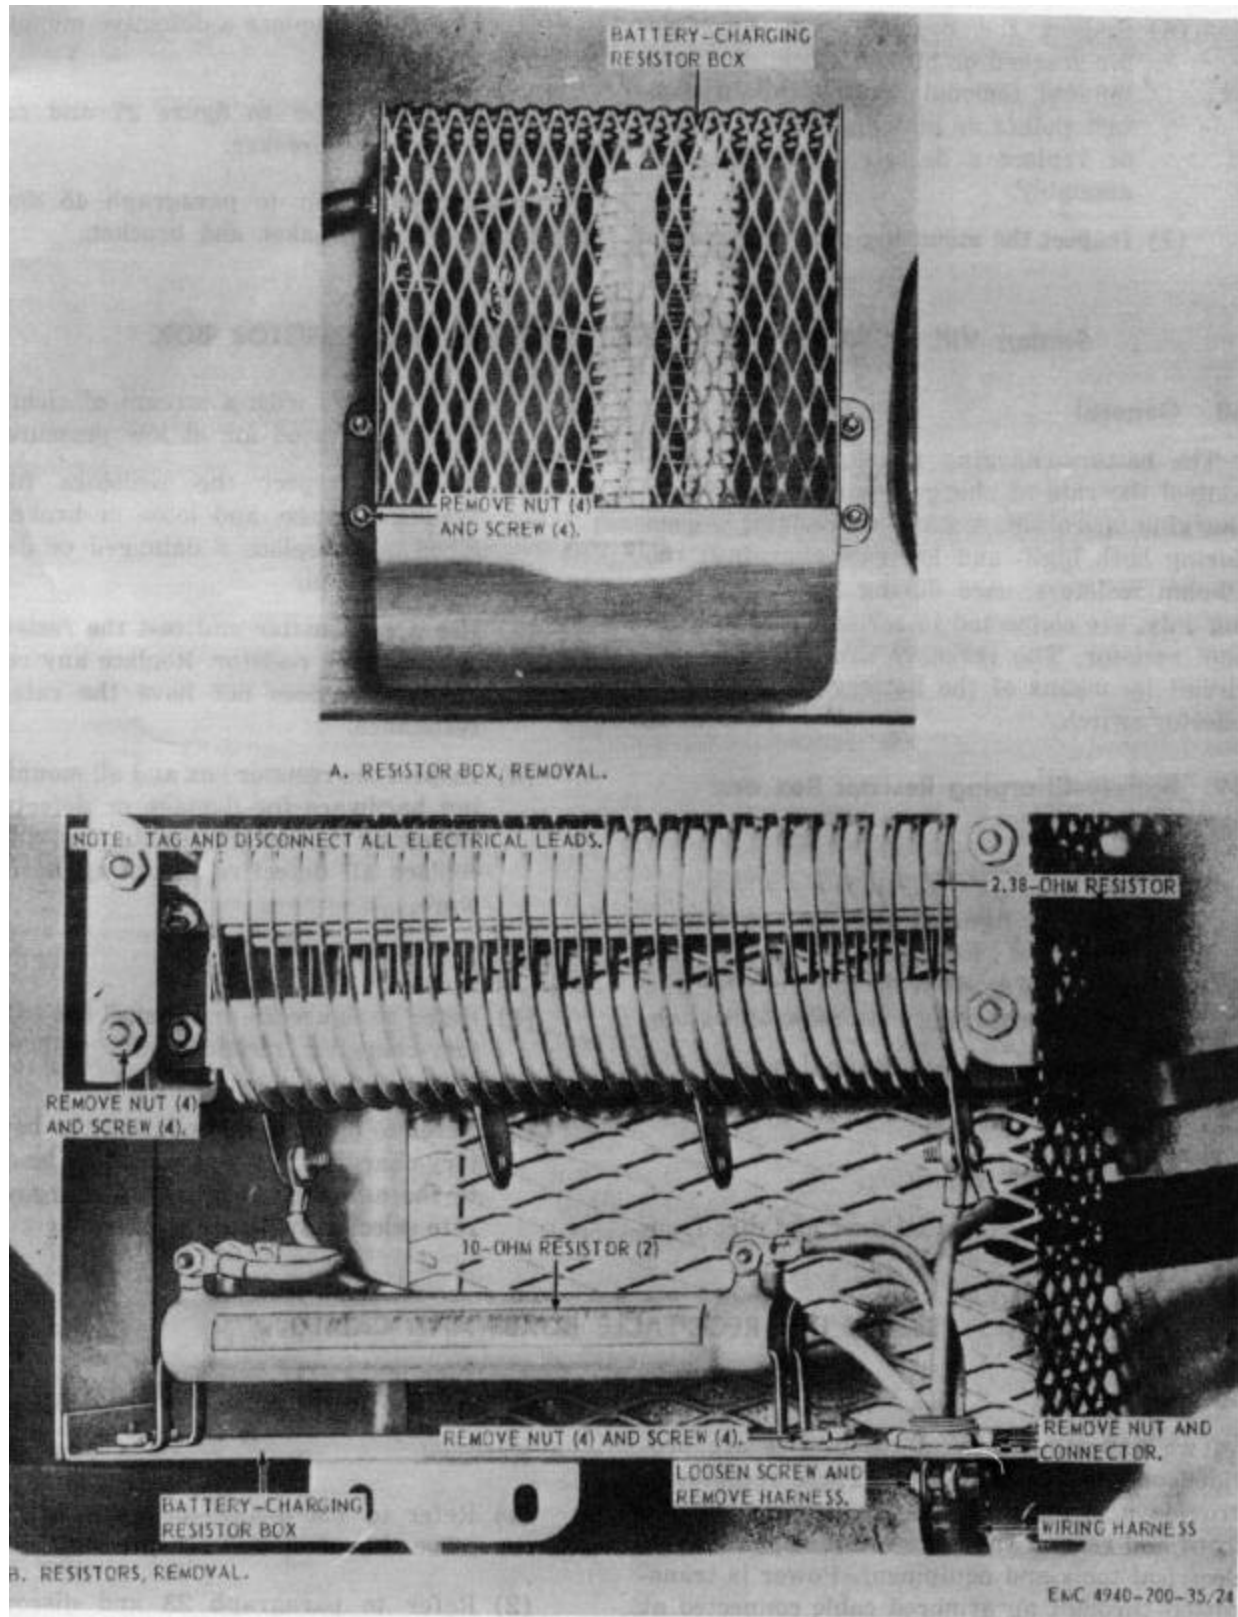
Battery-charging resistor box and resistors, removal and installation.
